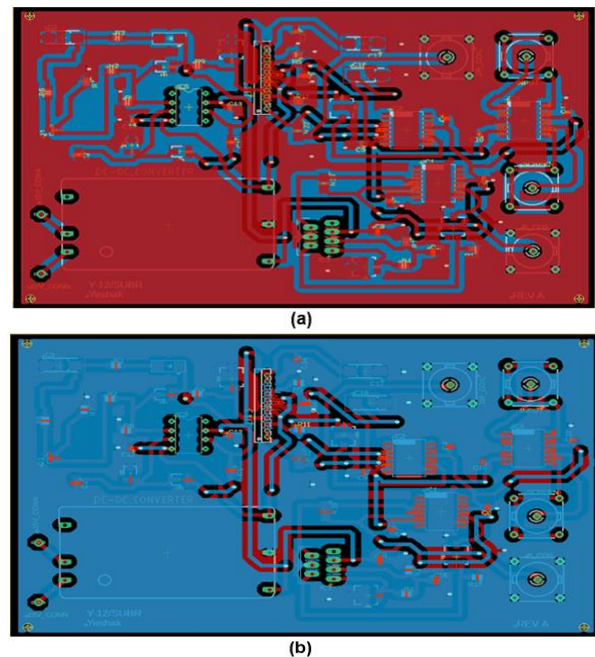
(a) Top Layer of Printed Circuit Board; (b) Bottom Layer of Printed Circuit Board.
